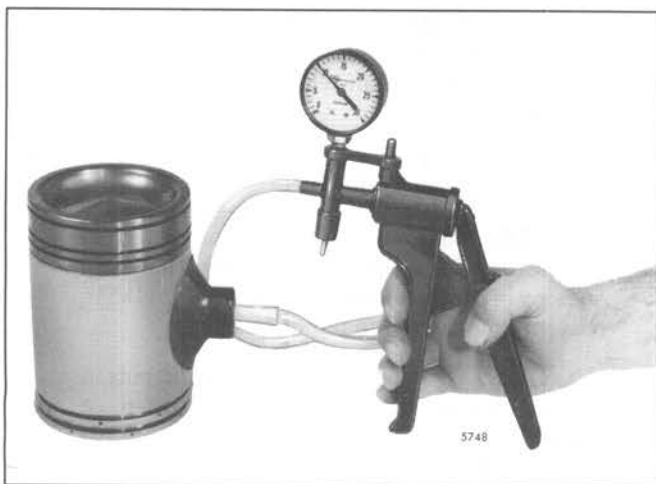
Checking Piston Pin Retainer for Proper Sealing with Tool J 23987-01
